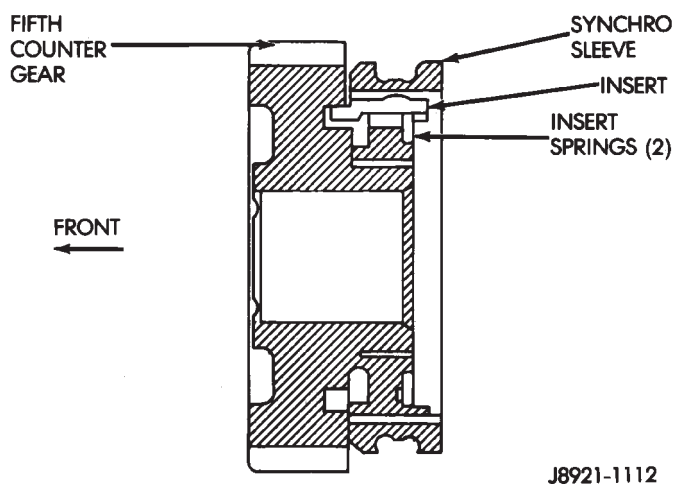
Assembling Fifth Gear And Synchro Assembly
